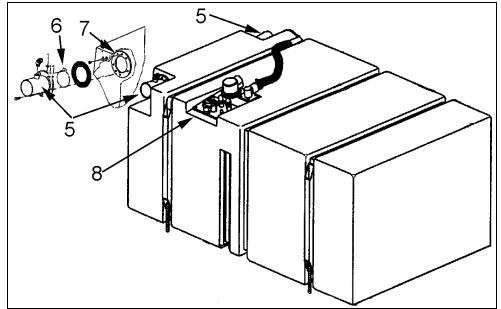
(8) FILLER TUBE FITTINGS, (8) EXISTING CHECK VALVE, (7) INTERNAL FLANGE, (8) CONNECTION PANEL
